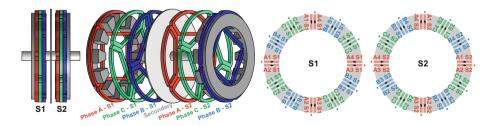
The winding design of the Axial-DSIM (The three-layer planar, double-layer winding design).
